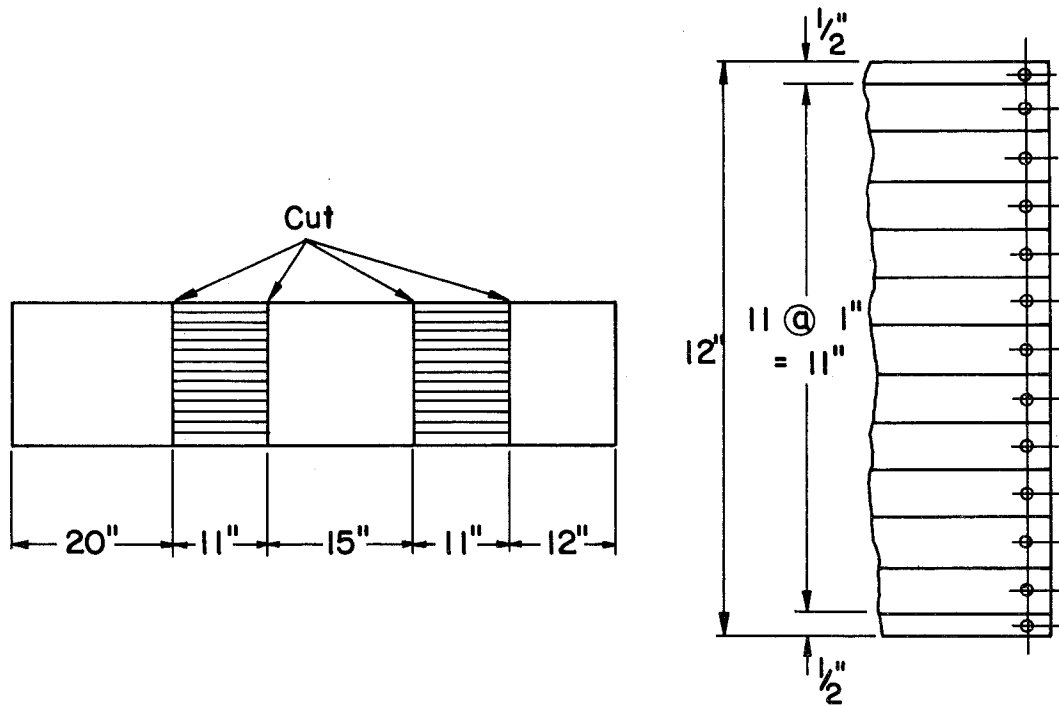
LAYOUT OF A PLATE WELDED ALONG THE CENTERLINE
